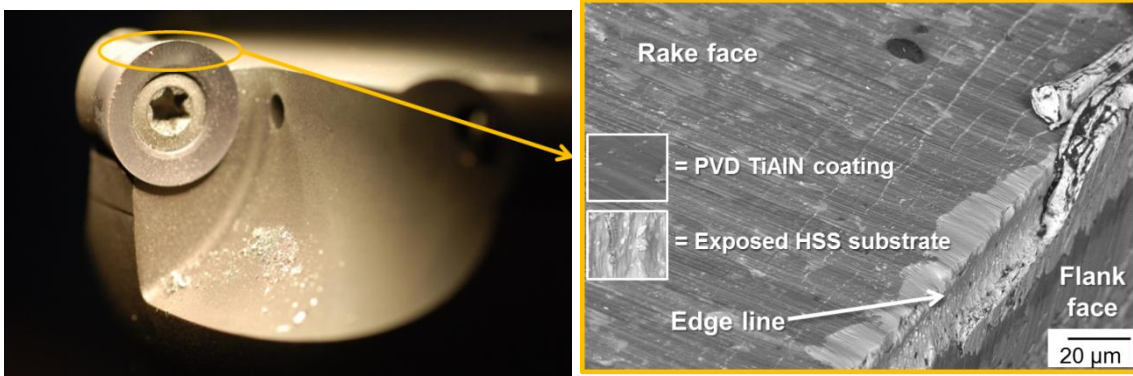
The milling cutter. (a) overview in the tool holder and (b) typical wear of the cutting edge after a cutting test.
